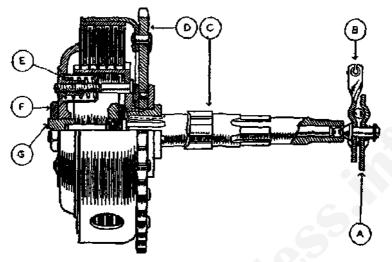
CLUTCH-OPERATING MECHANISM—B.52 TYPE.
